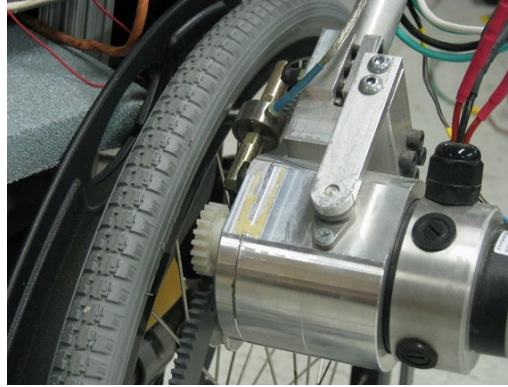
Motor 'hand' with shaft-mounted pinion gear and ring gear push-rim.
